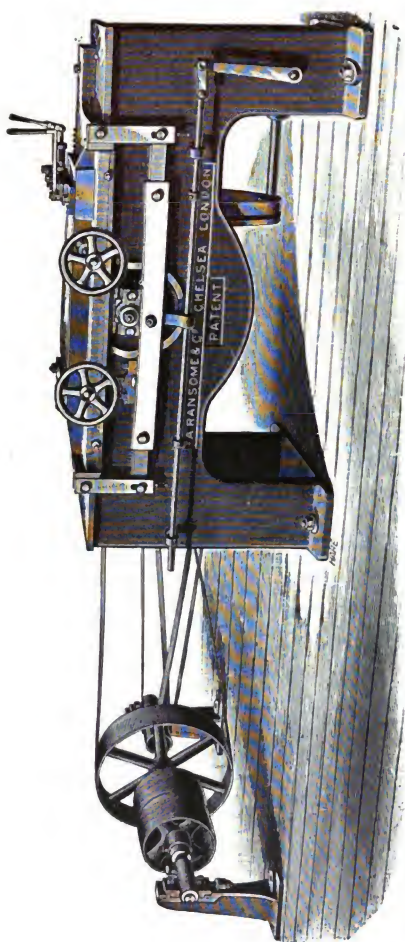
UNIVERSAL STAVE-JOINTING MACHINE.
